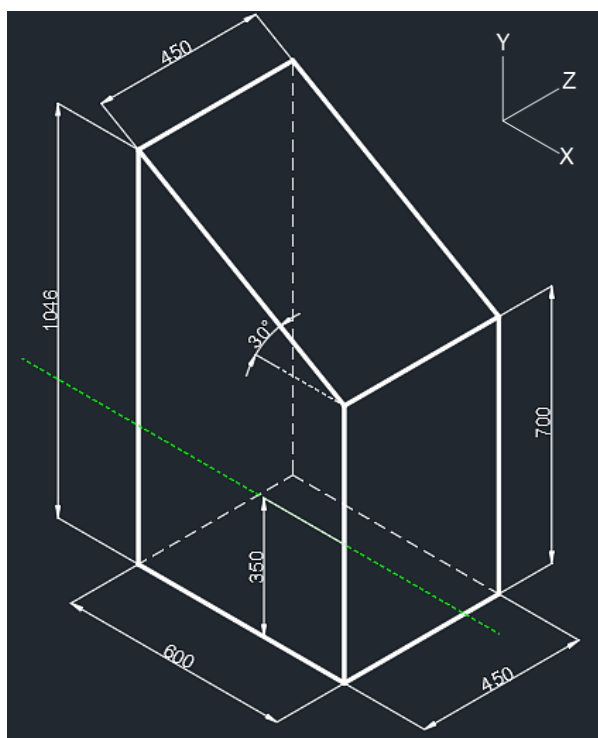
15: Dimension of heating chamber structure (all dimensions in the figure is in mm).
